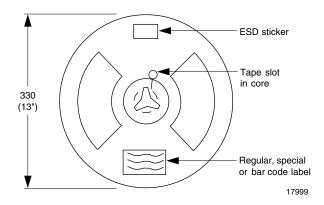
Tape and Reel Shipping Medium (EIA-481, revision A, and IEC 60286), 2000 units per reel
